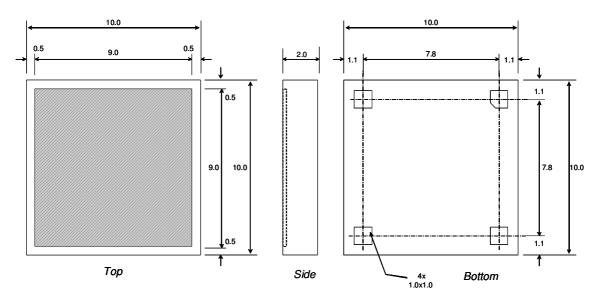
Mechanical Drawing (all dimensions are nominal and in mm)
